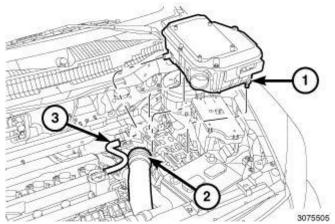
Left Engine Mount Assembly Courtesy of CHRYSLER GROUP, LLC
